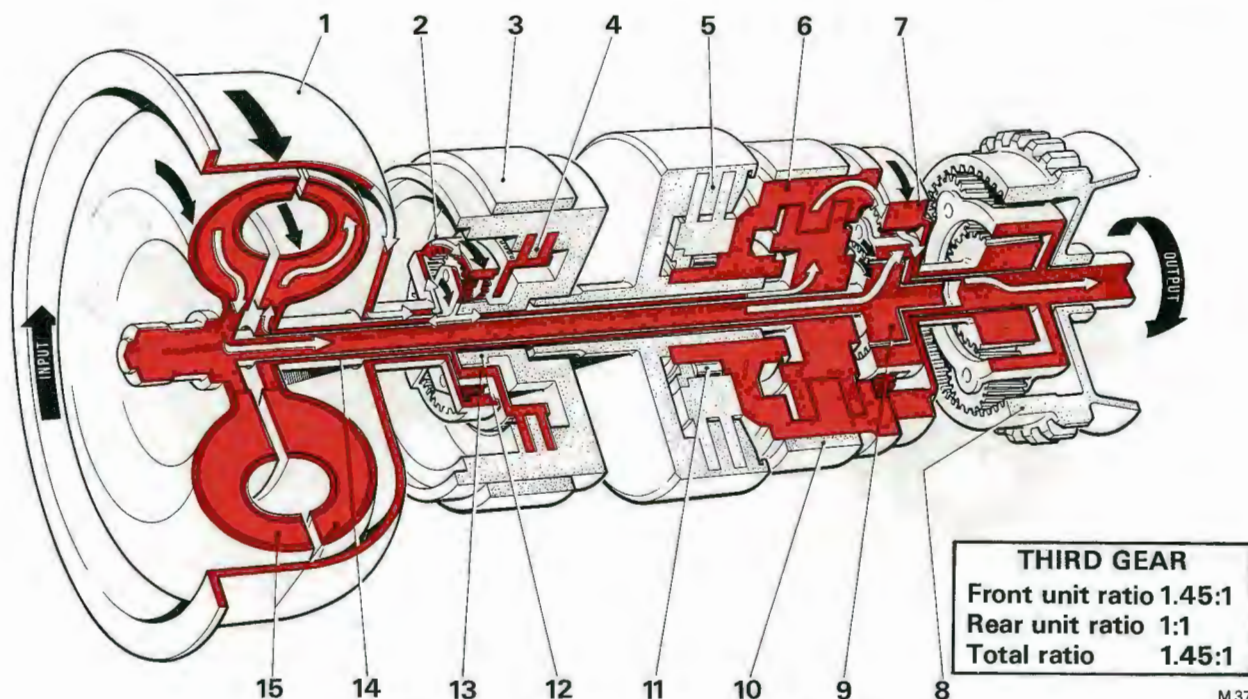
LINE OF DRIVE IN 3rd GEAR
